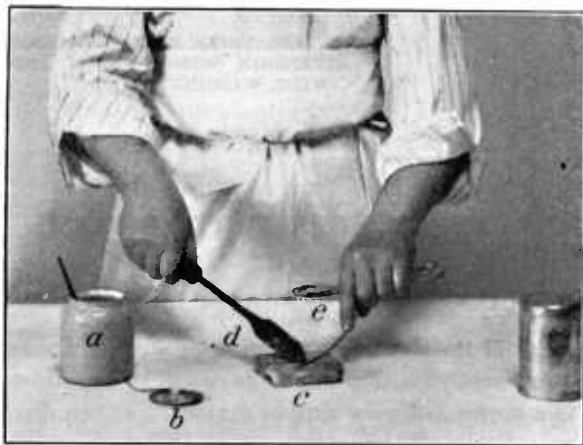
Tinning the tipping copper (or soldering iron): a, Flux jar and brush; b, solder-hemmed cap; c, bar sal ammoniac; d, tipping copper or soldering iron; e, wire solder.
